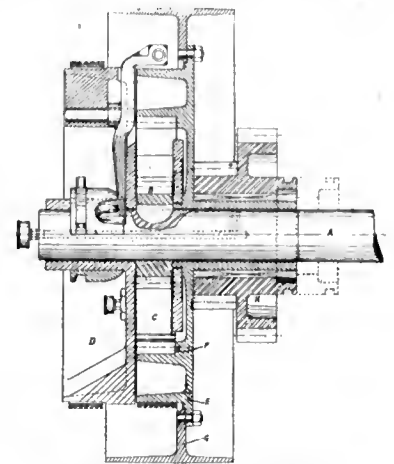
DETAILS OF TWO SPEED GEAR AND REVERSE CLUTCH MECHANISM.
